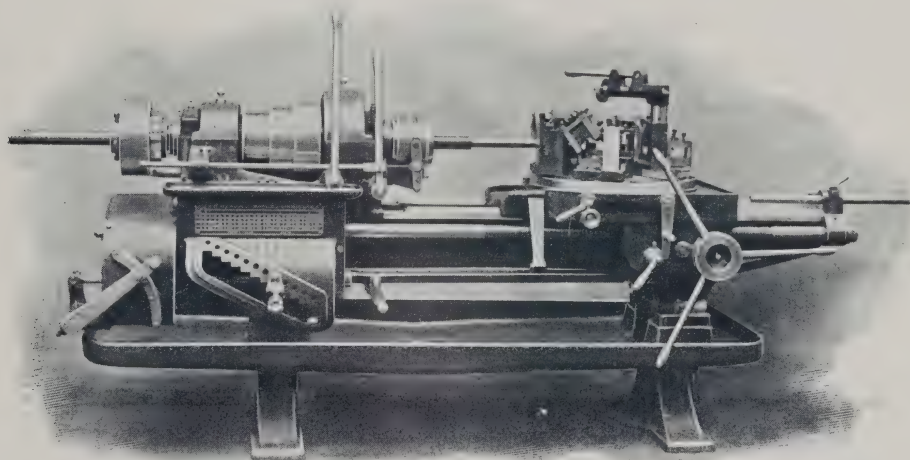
WARD'S 9-INCH FLAT TURRET LATHE.
